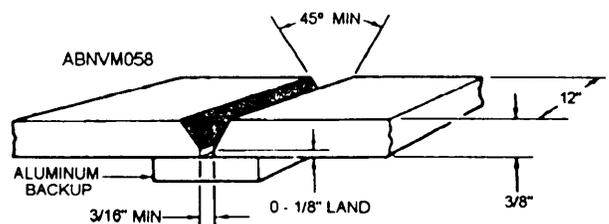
Joint design flat-position, single-pass butt welds in aluminum plate.
